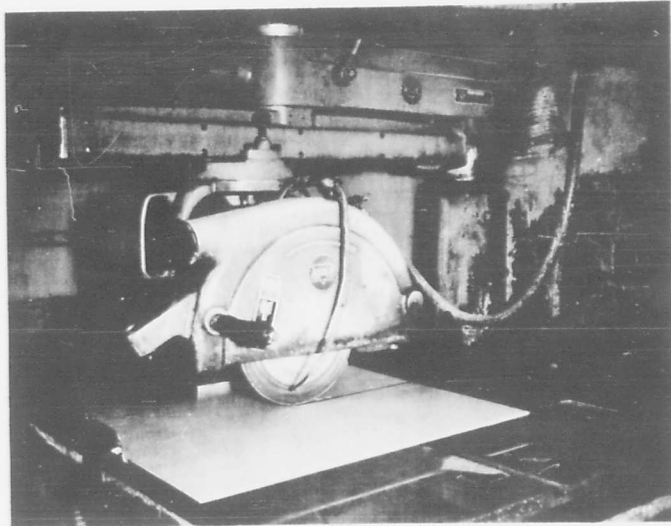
1/8-in. Panel Being Cut Into Blanks on Diamond Saw
